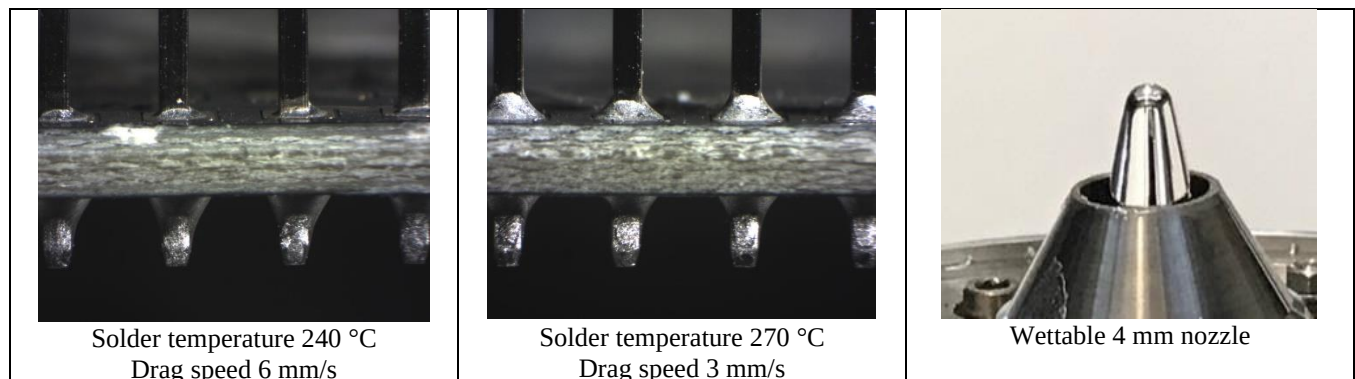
Good soldering at 270°C for test board 1 (Test board 1 – FR4 material – ENIG finish – 1.6 mm thick).
